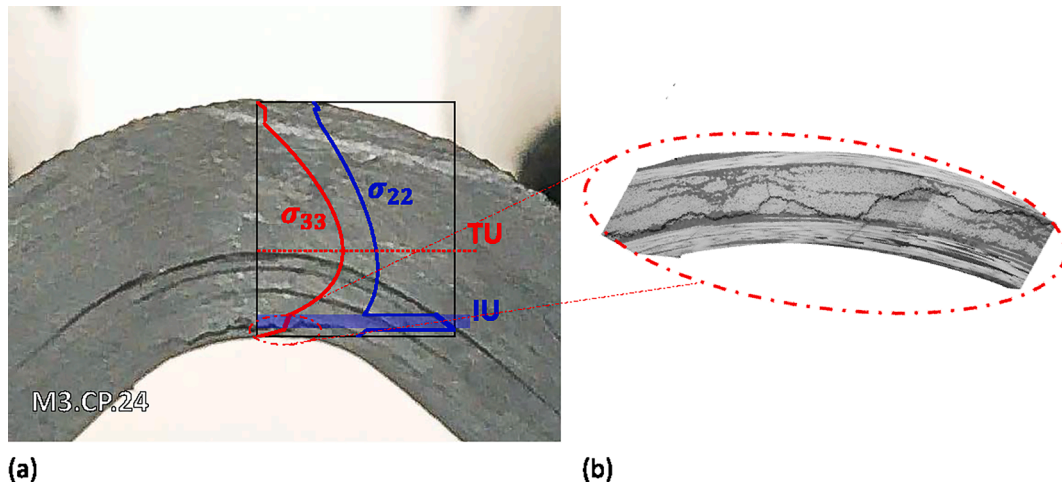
Correlation between stress solution and failure locations in a typical M3.CP.24 samples: (a) view of the corner; (b) zoom view of the crack in the innermost 90° layer.
